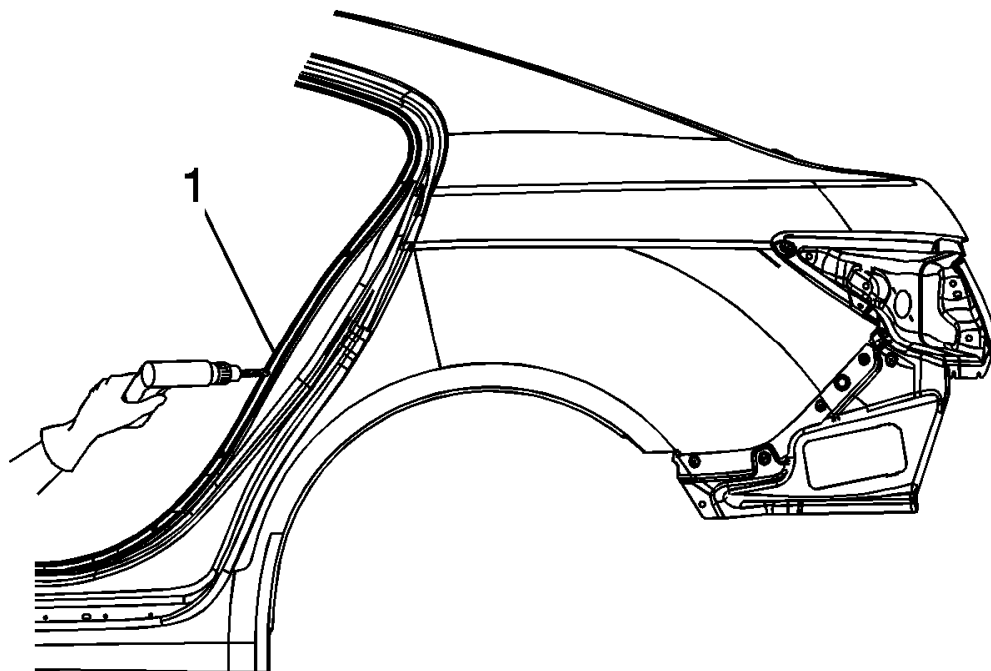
Drilling Plug Weld Holes In Service Quarter Outer Panel
